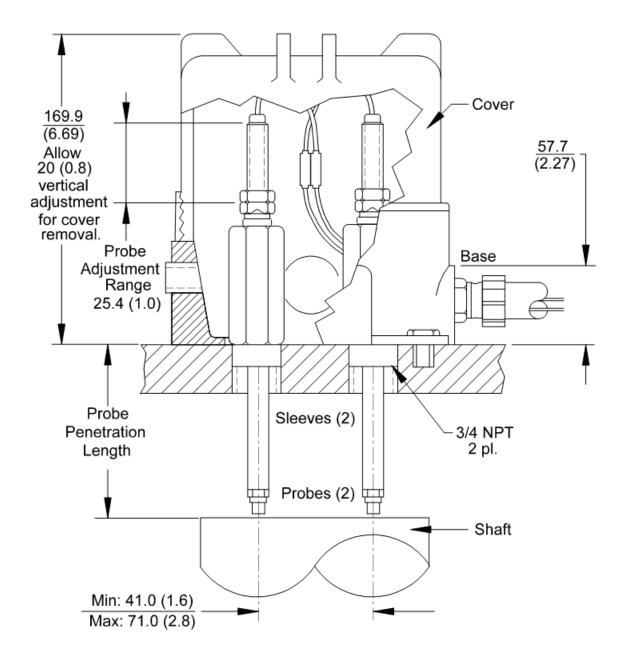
21022 Dual Axial Probe Housing Assembly Dimensions, Side View Dimensions are in millimeters (inches).
